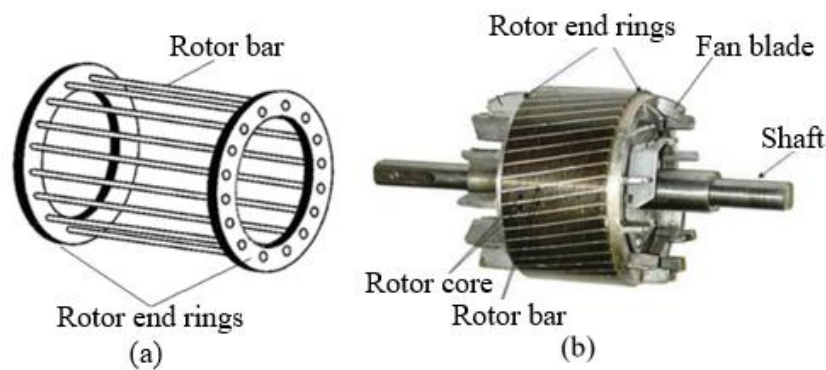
Caged Rotor: (a) cage; (b) complete cage rotor [38]
